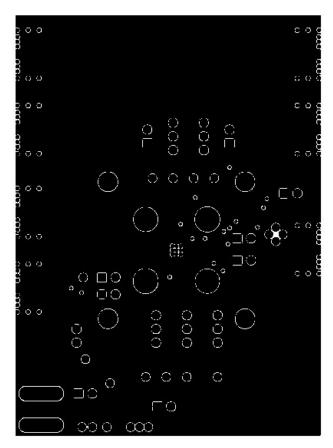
MAX3740A EV Kit PC Board Layout - Power Plane
